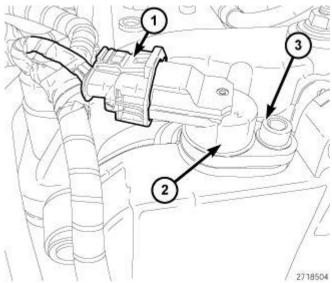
CAMSHAFT POSITION SENSOR HARNESS CONNECTOR Courtesy of CHRYSLER LLC
